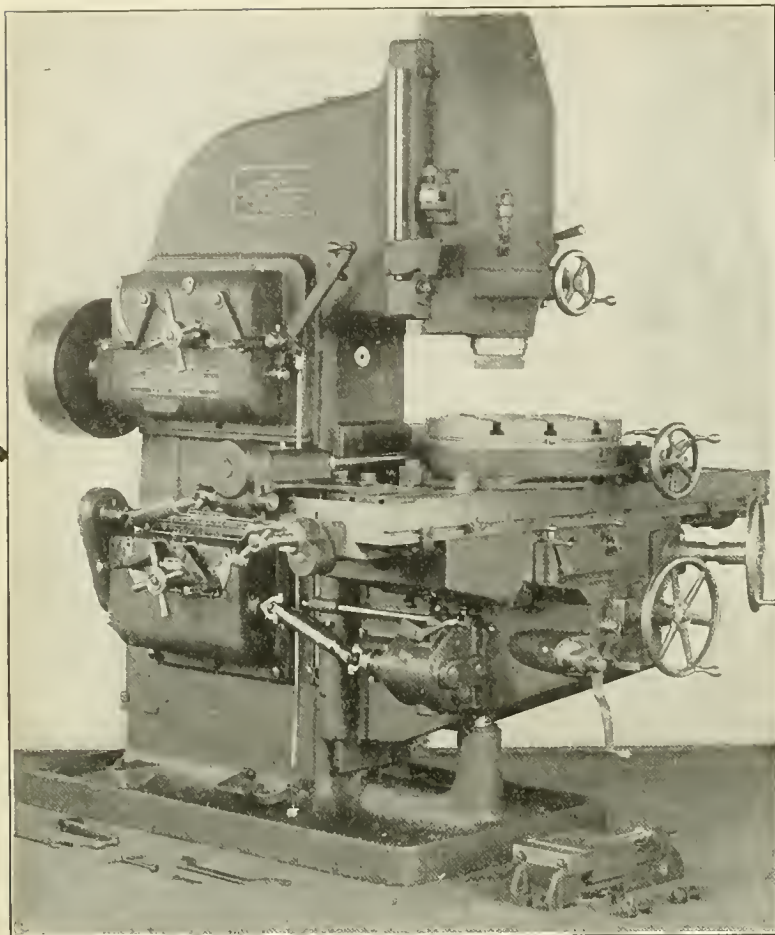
VERTICAL MILLING MACHINE, CONSTANT SPEED BELT DRIVE, CIRCULAR MILLING ATTACHMENT.
